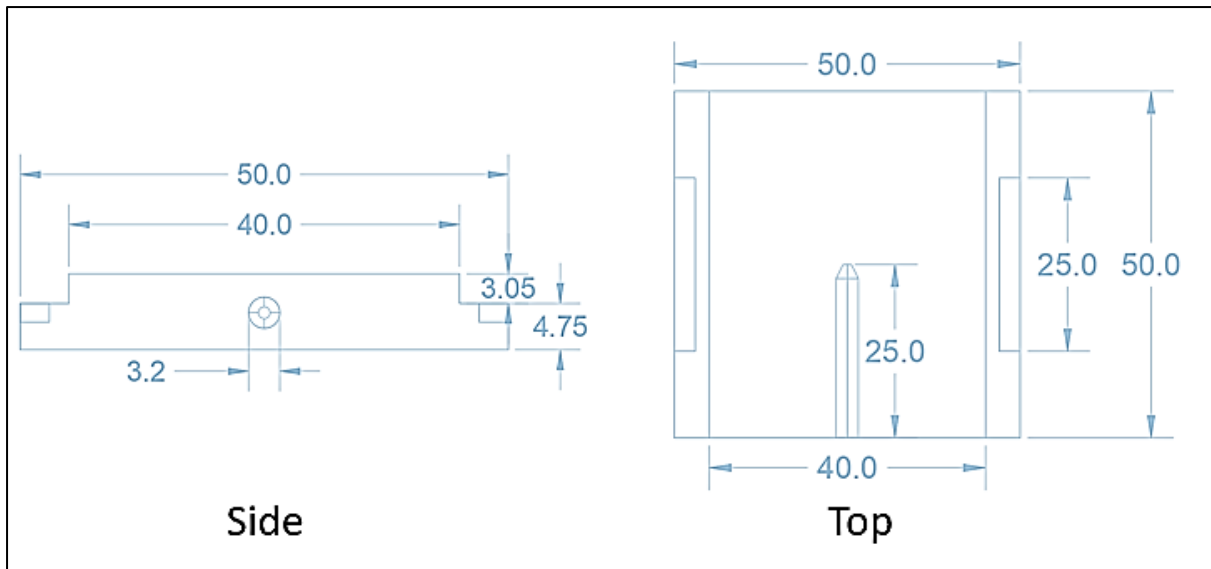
PT100 Thermocouple plate. Probe fits into 3.2mm hole. (All units in mm.)
